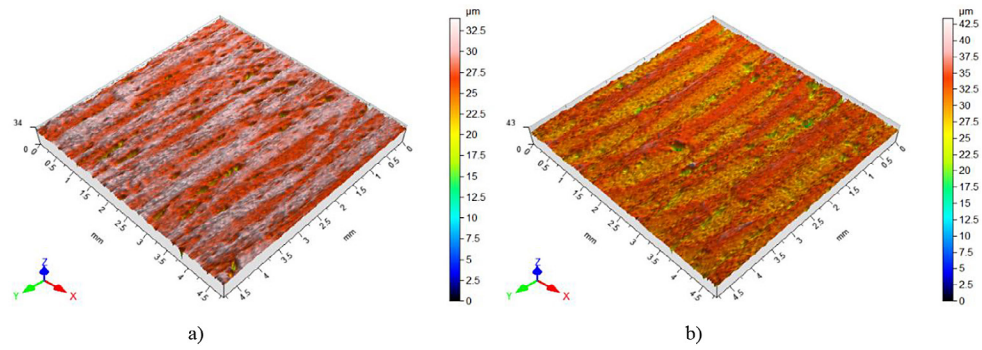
3D topography maps for the smallest 0.05 mm/tooth (a) and largest 0.60 mm/tooth (b) feed per tooth after milling the side surface of GFRP
